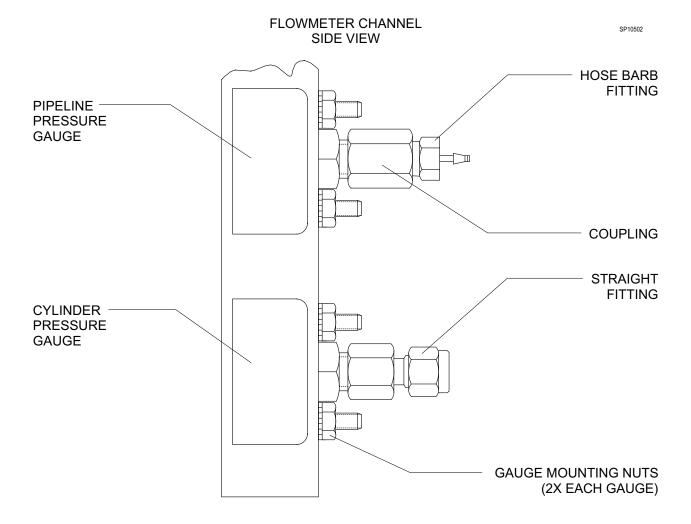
PIPELINE AND CYLINDER GAUGE ASSEMBLY AND MOUNTING
